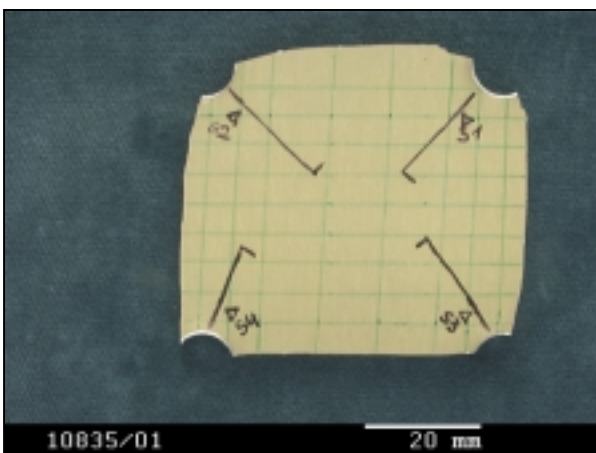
Sawed out part with marks for micro-fractographic cuts (flat panel)
